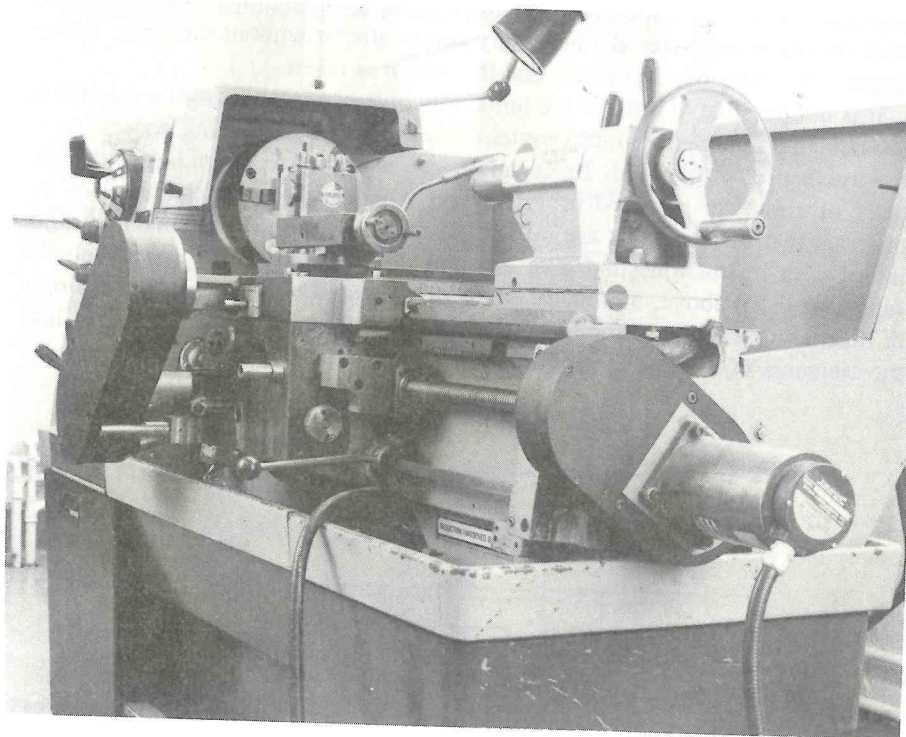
(a) Conventional center lathe fitted with servo motors.
